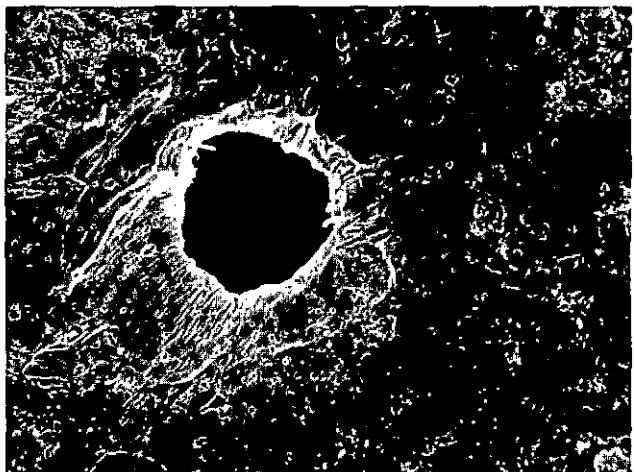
, (F60296). Injector cup hole after being wire brushed (enlarged)
